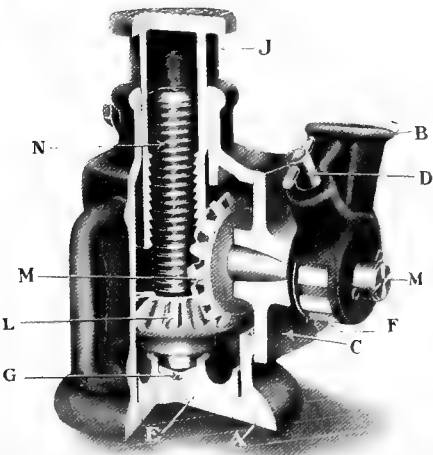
Ball Bearing Journal Jack. Duff Manufacturing Company.
